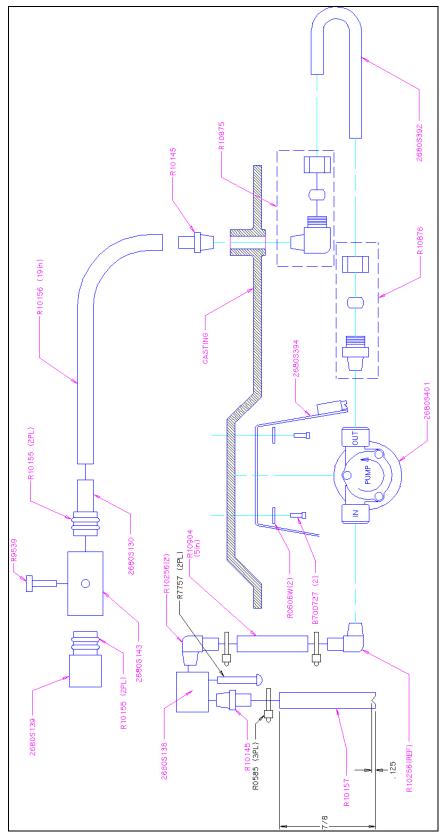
Pump Assembly Exploded Diagram (2780S804)
